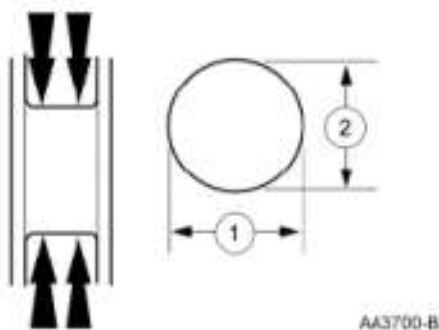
Measuring Crankshaft Main Bearing Journal Diameters
